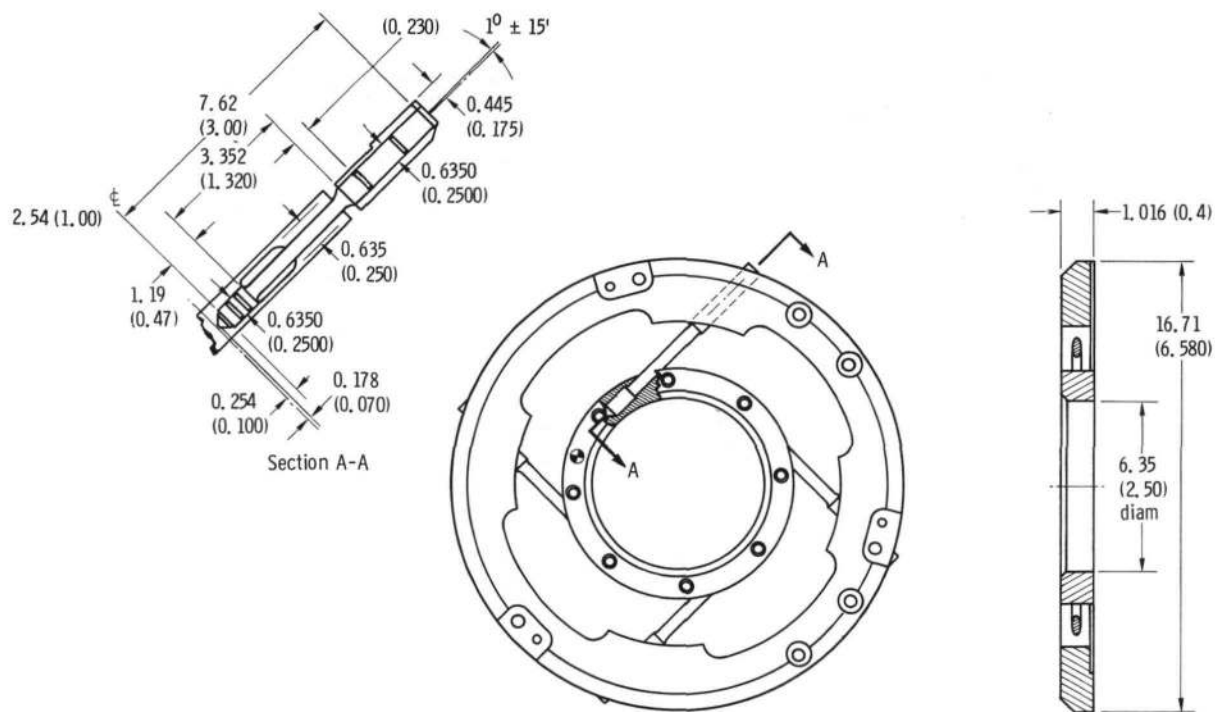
Thrust bearing flexure mount. (Dimensions are in cm (in.))
